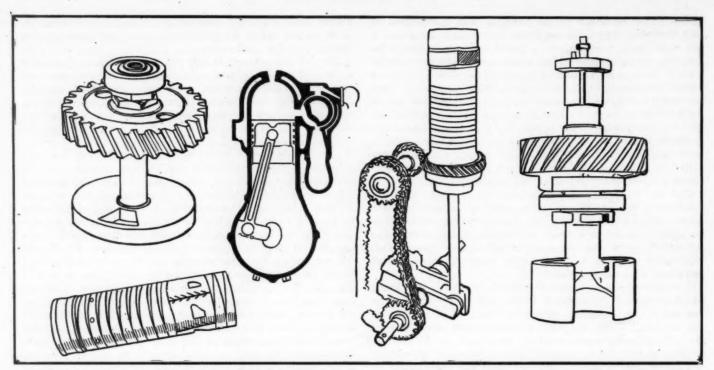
Rotary disk of Reynolds motor. Fig. 9—Twisting sleeve valve of Argyll engine. Fig. 10—Cross section of Henriod-Darracq design. Fig. 11—Sleeve and drive of C. L. C. motor. Fig. 12—Cid rotary valve
